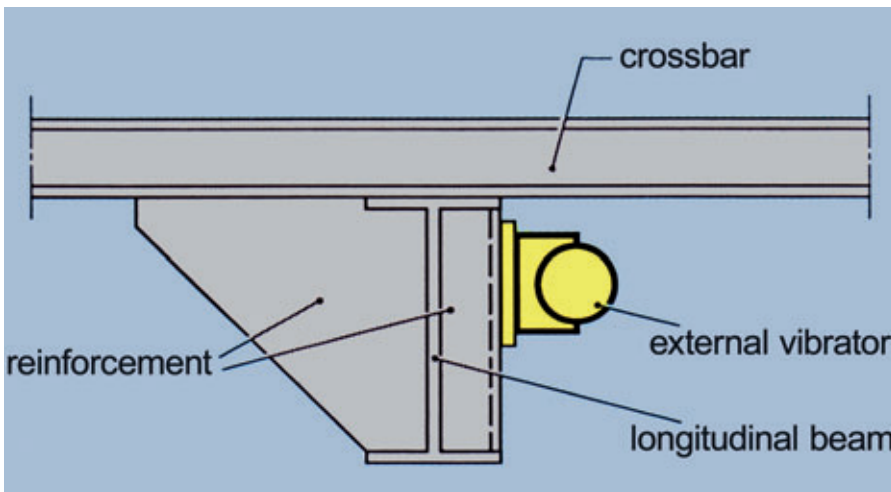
Vibrator arrangement with structural stiffening on the longitudinal beam of a large vibrating table
